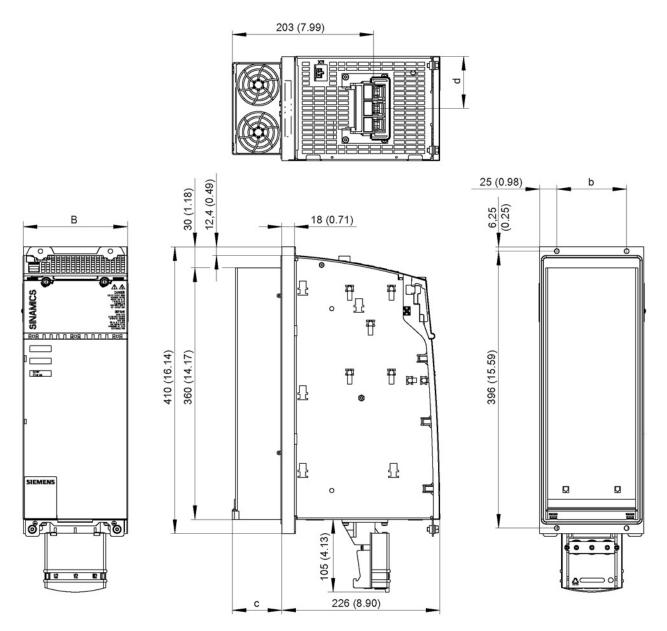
Dimension drawing of 45 A, 60 A, and 85 A Motor Modules Booksize with external air cooling, all dimensions in mm and (inches); example 45 A
